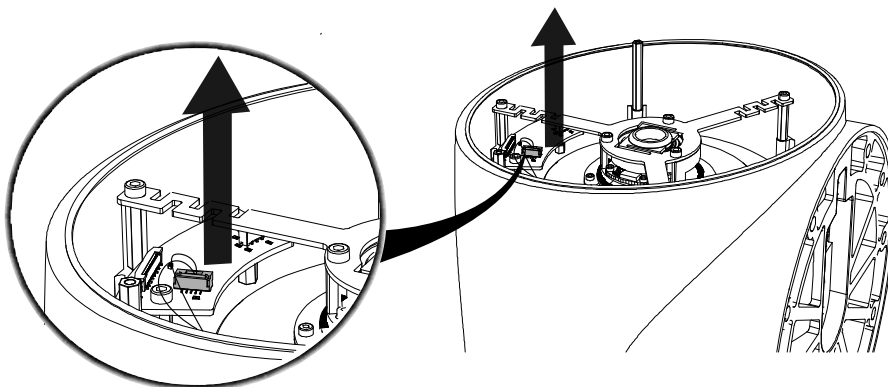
Brake wire of joint 1 and 2 of Zu 20
